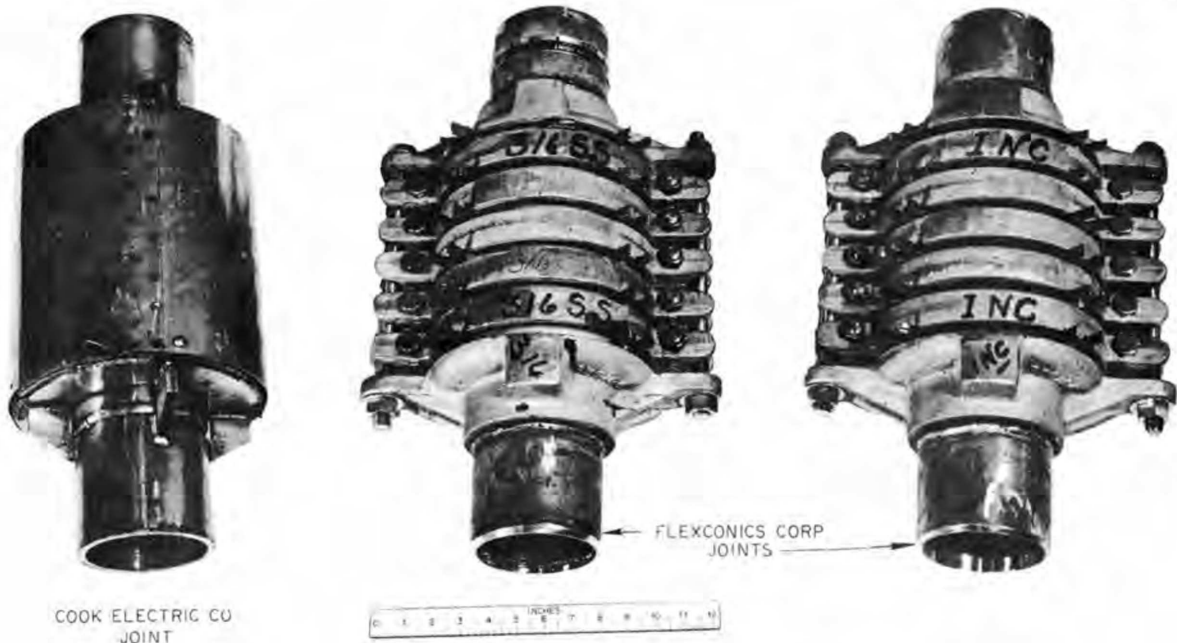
Expansion Joints To Be Tested in the Expansion-Joint Test Facility.
